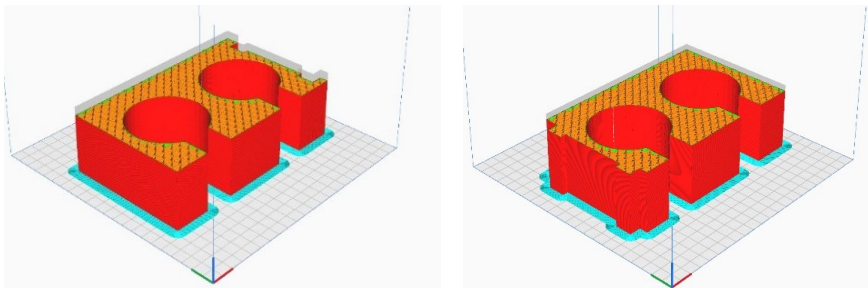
Frame generated from CAD and exported to Cura Program to Print on 3D printer
